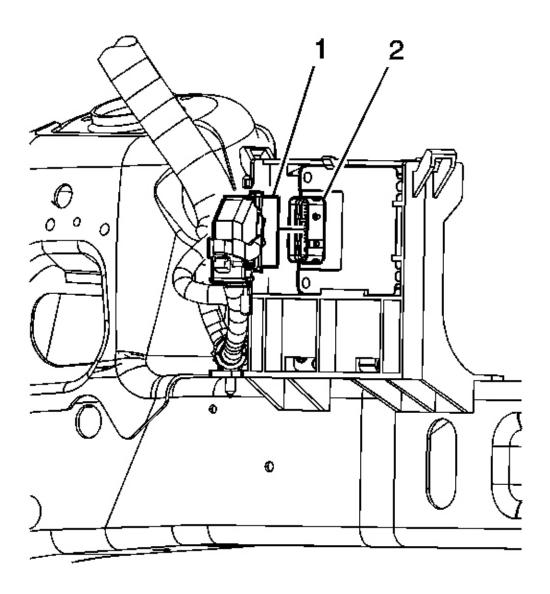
Identifying ECM/TCM Connectors & Bracket Courtesy of GENERAL MOTORS CORP.
